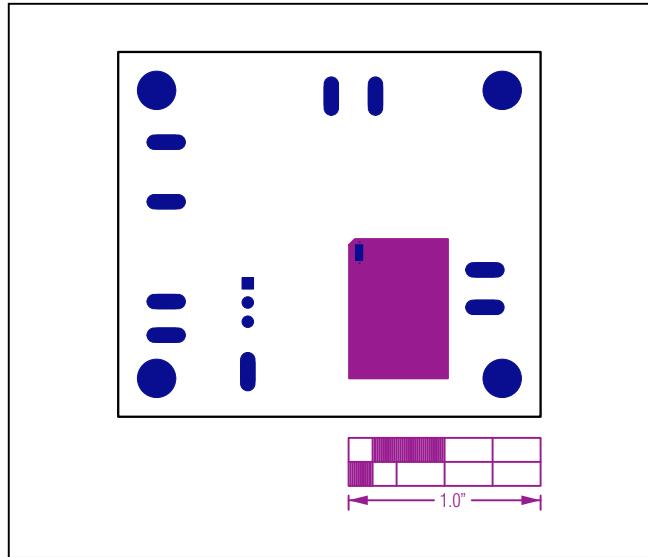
MAX17542G 3.3V Output EV Kit Component Placement Guide—Bottom Solder Mask
